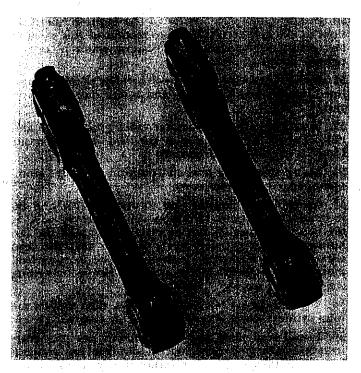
CONNECTING ROD JOINTS-RIGHT AND WRONG
